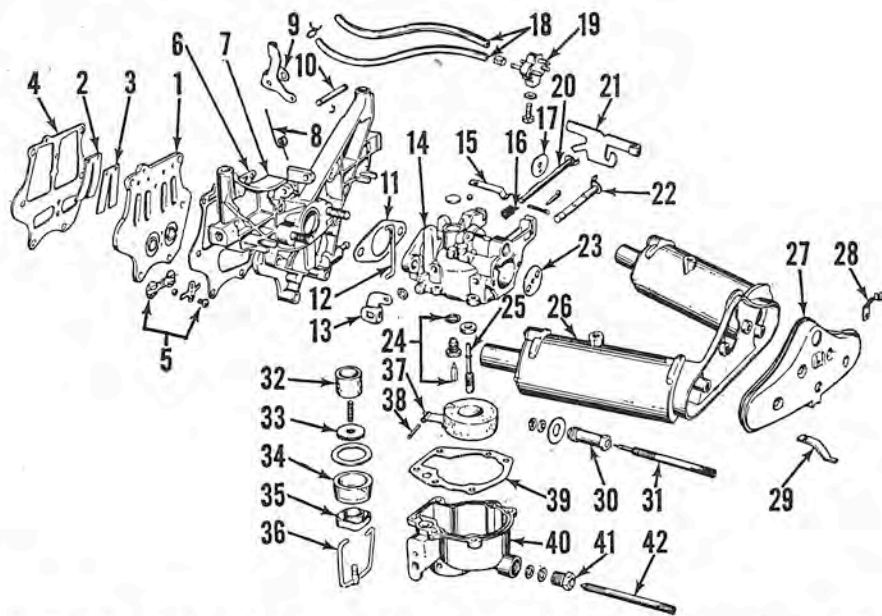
Exploded view of 1958 model Fleetwin carburetor. Other models are similar.
